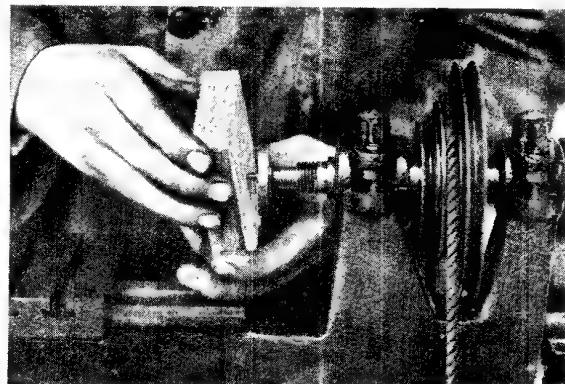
In this photograph the operator is seen mounting a wood block on the screw chuck
